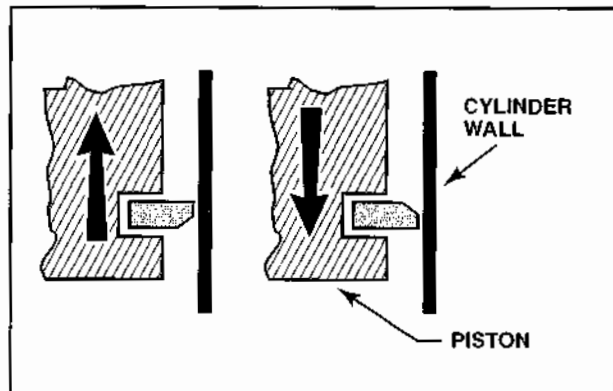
An oil scraper ring installed with its beveled edge away from the cylinder head forces oil upward along the cylinder wall when the piston moves upward. However, if the beveled edge faces the cylinder head, the ring scrapes oil toward the crankcase when the piston moves down.
